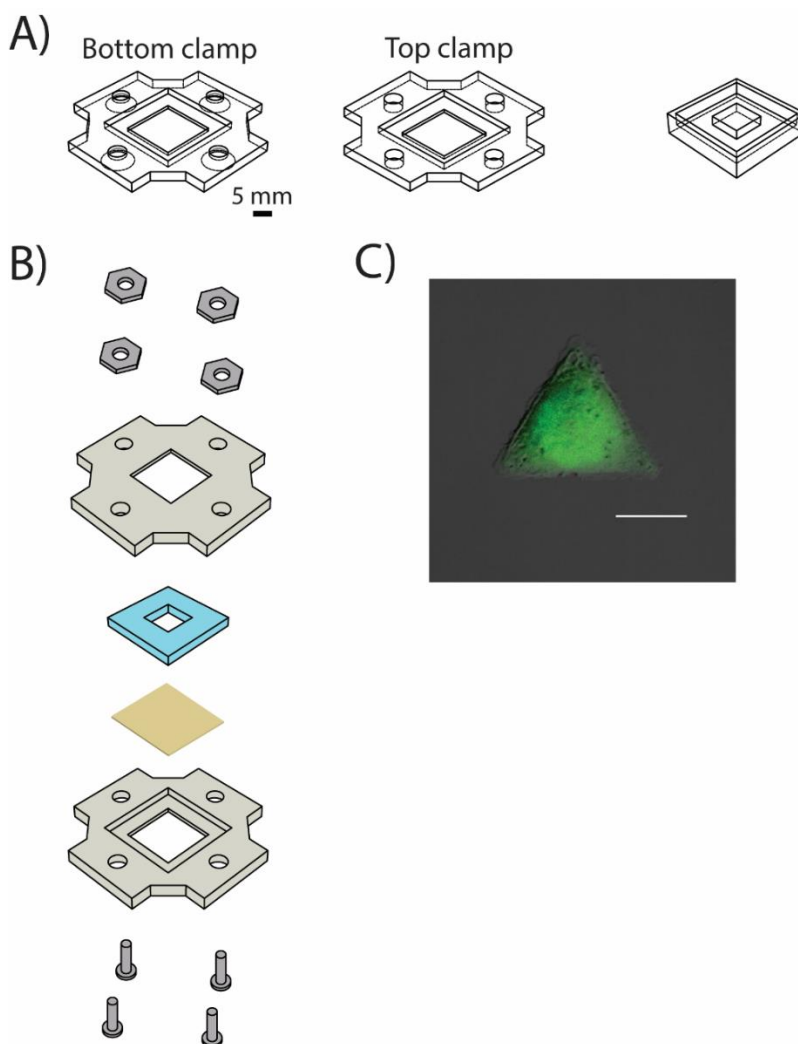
Clamp design and assembly. A) SolidWorks renderings of 3D printed clamp (left, middle) and PDMS master (right), B) Clamp assembly C) HUVEC cell patterned on the SAM in a triangle shape in the cell culture device (scale bar= 20 μm).
